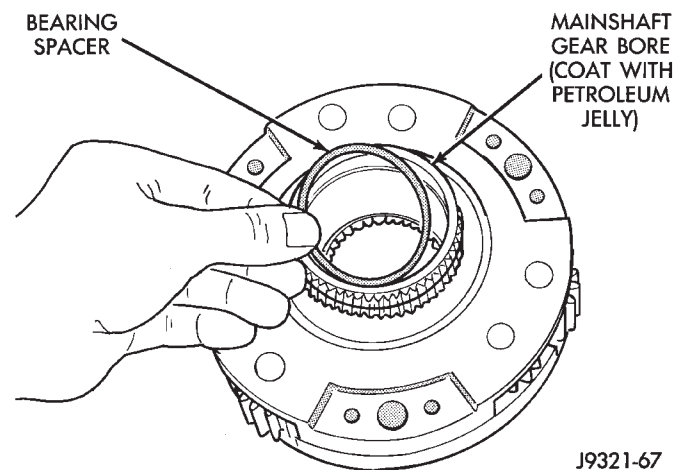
Installing Bearing Spacer In Mainshaft Gear
